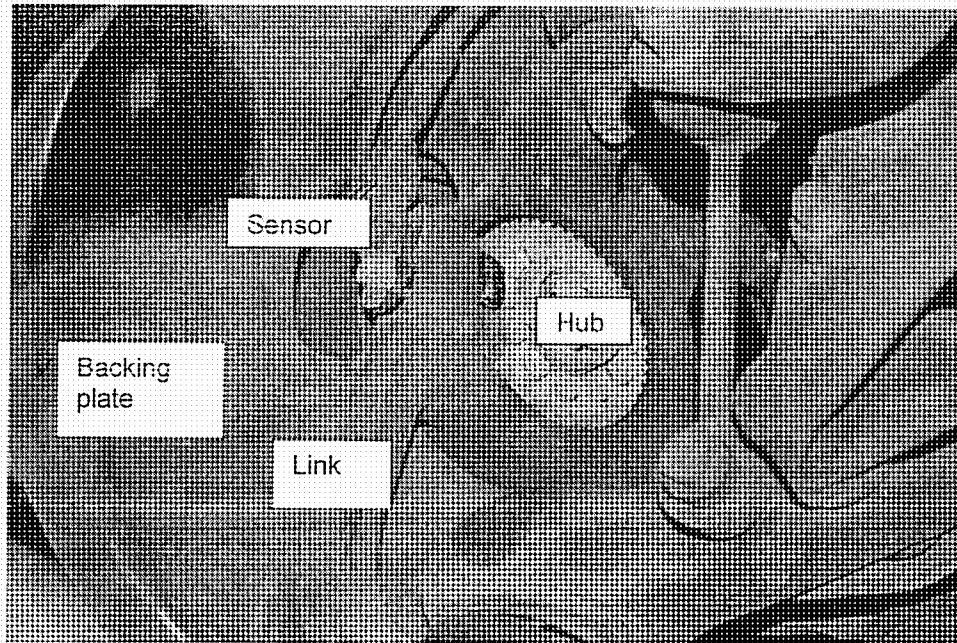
Inside view of brake backing plate (disk shield). This figure shows the hub, link, speed sensor, and the disk shield. The bearing is not visible as it is pressed in place (with a 3-ton force) and internal to the vertical link and hub. However, the bearing is clearly frozen. Sensor appears to have been over- heated.
